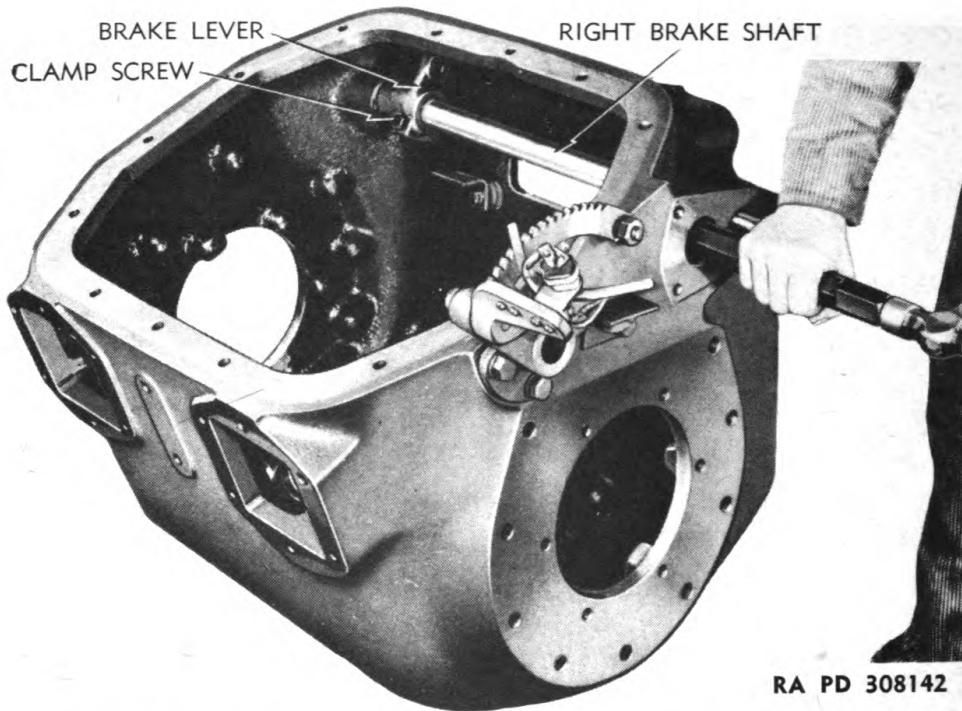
Removing Brake Shaft Bushing, Using Remover (41-R-2376-290)
